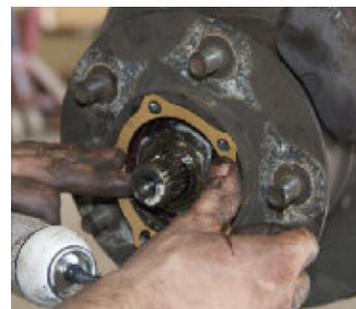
The drive member hub gasket sitting on the hub face. Install drive flange with bolts and spring washers.
